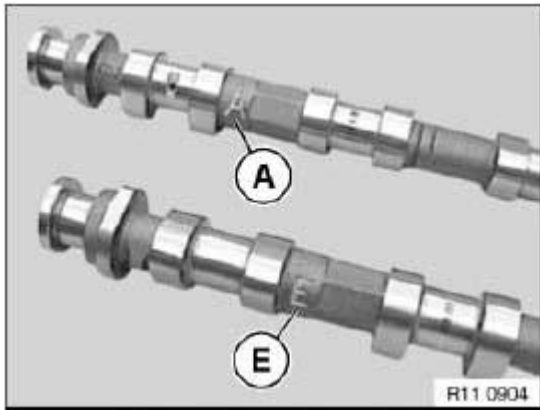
Identifying Exhaust Camshaft And Inlet Camshaft
